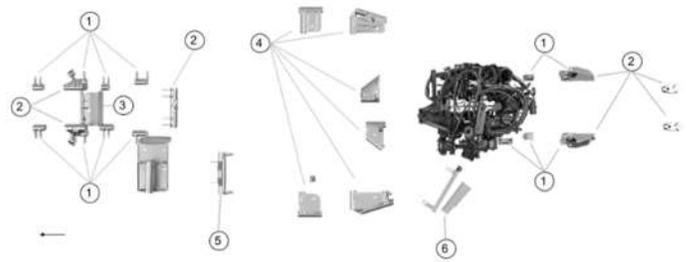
Top view of the location of the interface geometry with the scanned engine block in the rear of the chassis. (1) A-arms, (2) shock mounts, (3) steering rack mount, (4) seat mounts, (5) steering column mount, (6) fan mount.
